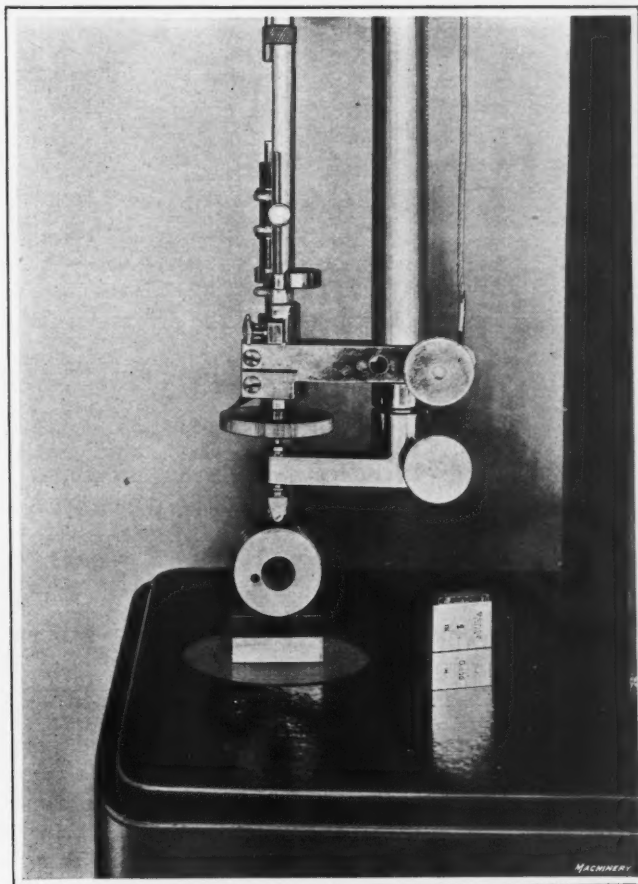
Use of Swedish Gages on Pitch Diameter Comparator for establishing Size of Master Thread Gage
